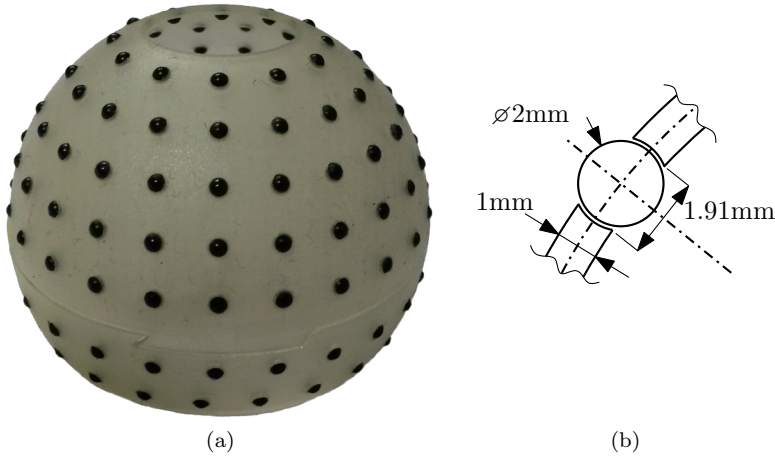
Spherical bearing: (a) photo of the realized prototype, (b) part of the sectional view to visualize the placement of the bearing balls.
